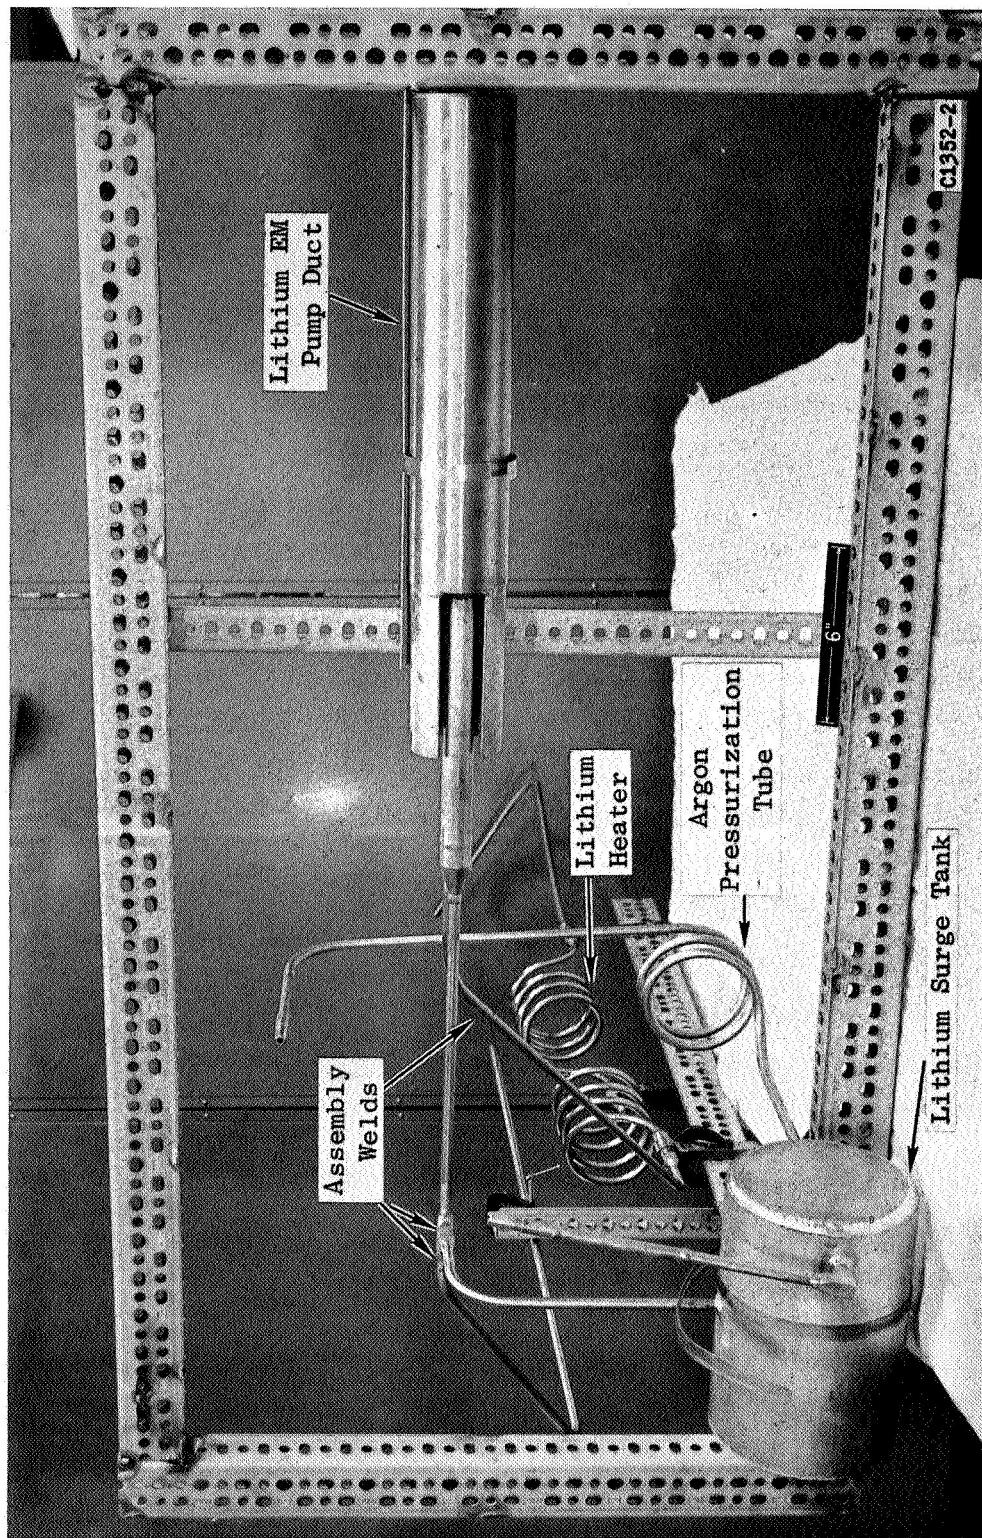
Lithium Surge Tank and EM Pump Subassembly of the T-111 Corrosion Test Loop Mounted on the Welding Fixture. (Orig. C67110668)
